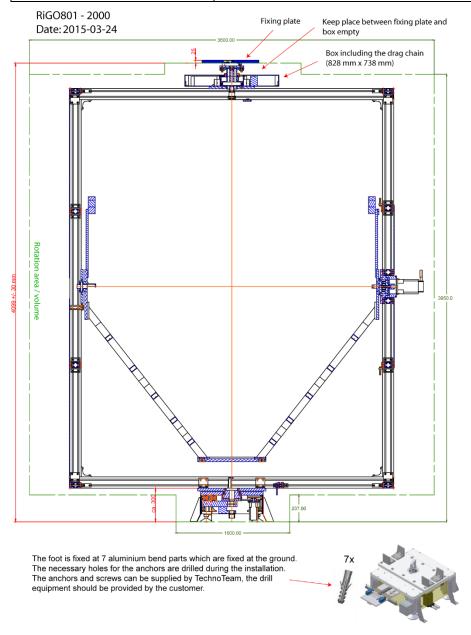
Schematic sectional drawing of RiGO801 - 2000
